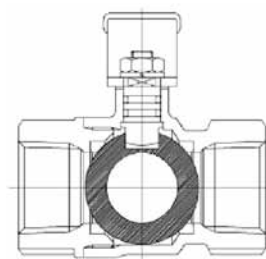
Threaded end type connection (directly tightening a pipe screw on the pipe)³
